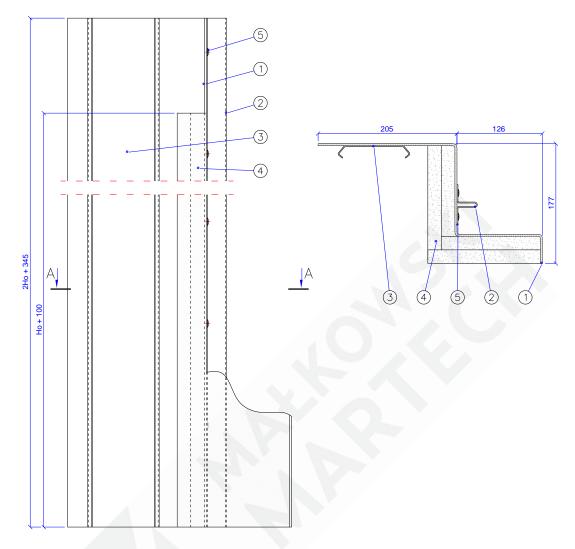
MARC-O60-01.03.00 [Door leaf guide rail assembly]
